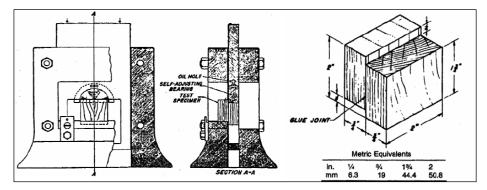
Shearing tool and ASTM standard dimensions for test replicates (ASTM 2008).
